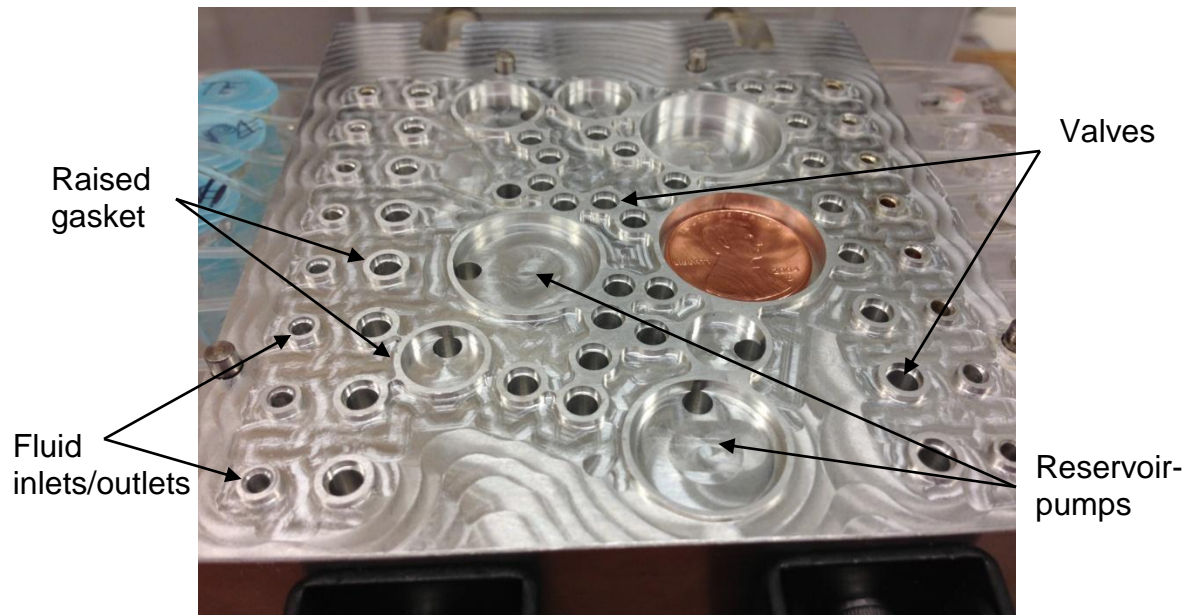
CNC machined manifold aluminum block with a 1mm raised aluminum gasket.
